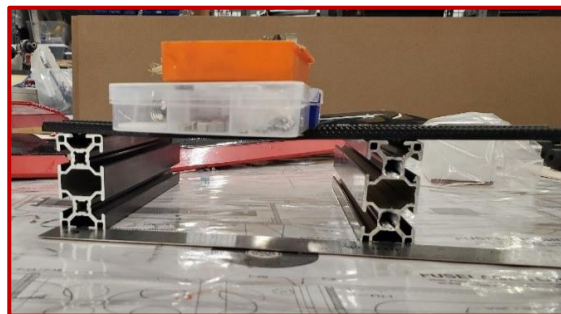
Load Test Setup, with Racks and Weights Shown
